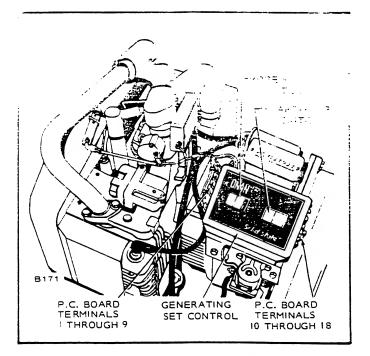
GENERATOR SET CONTROL ASSEMBLY
